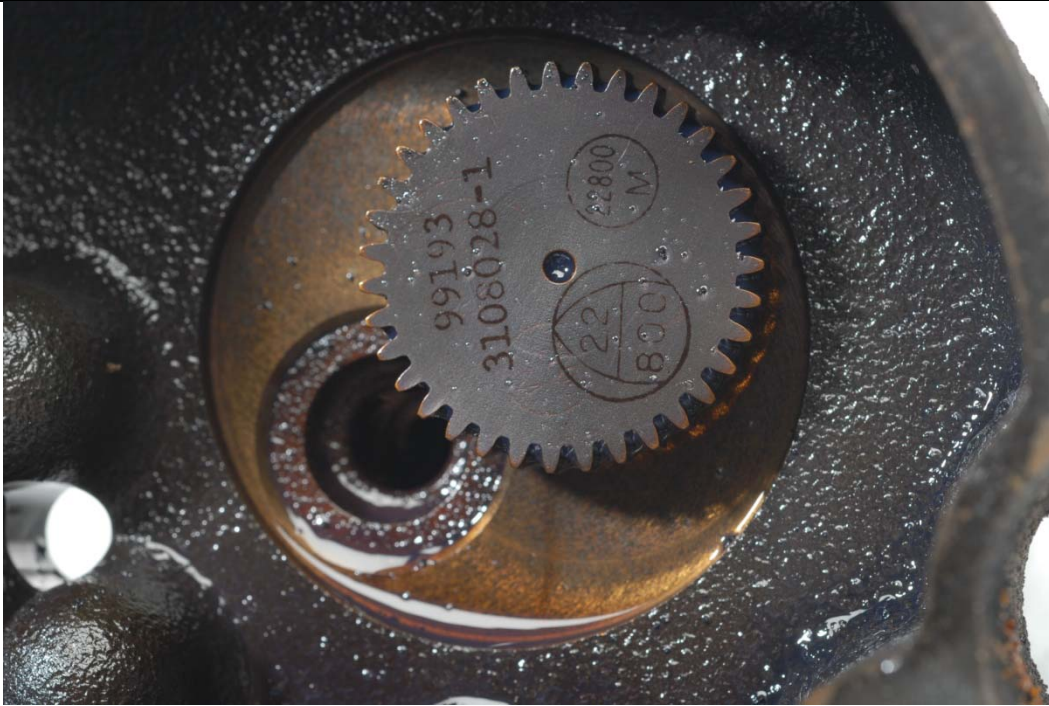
P-79297C, Turbine Oil-Scavenge Pump and Drive Shaft, FLA
